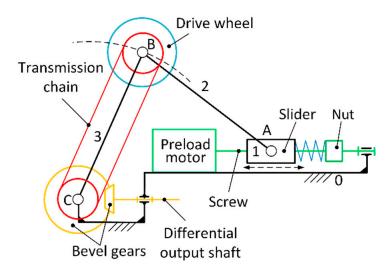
Mechanism for a self-adaptive pipe inspection robot.
